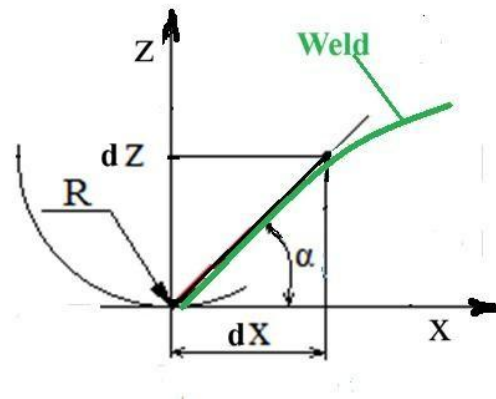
Scheme for determining the transition angle (α) and radius of curvature (R) in a 2D cross-section of the weld surface.
